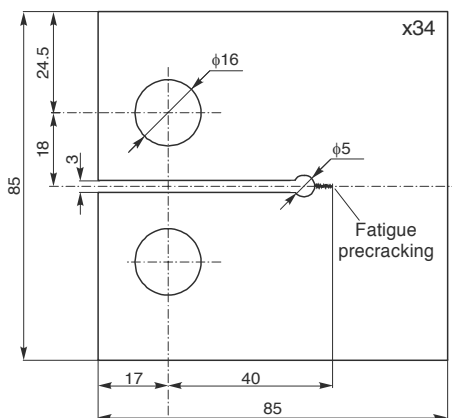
Dimensions of a compact tension specimen C(T) used for fracture toughness testing - K_{Ic}
